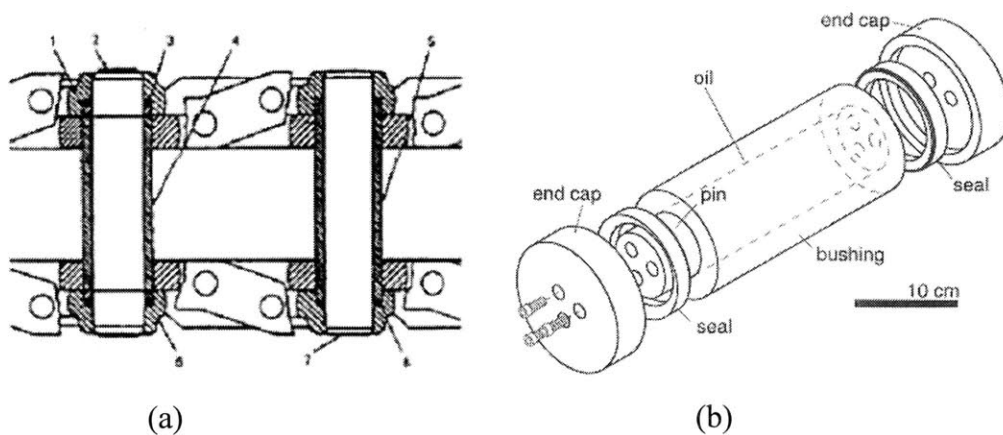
(a) Links are connected by pin joint assembly; (b) a pin joint assembly consists of pin, bushing, end cap and seal
